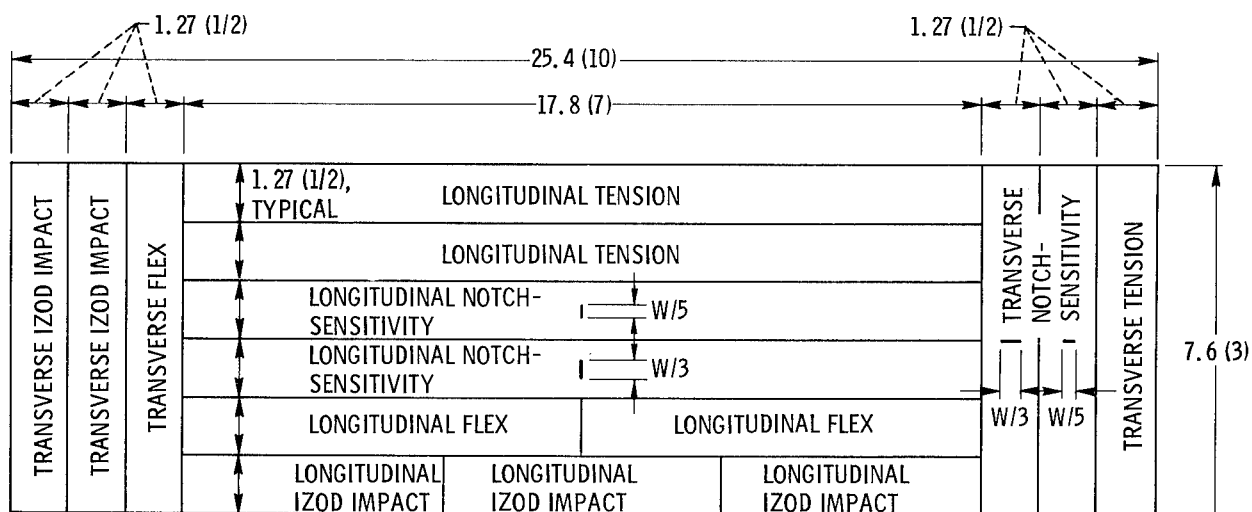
Typical specimen layout plan. (Nominal values. All dimensions are in cm (in.))
